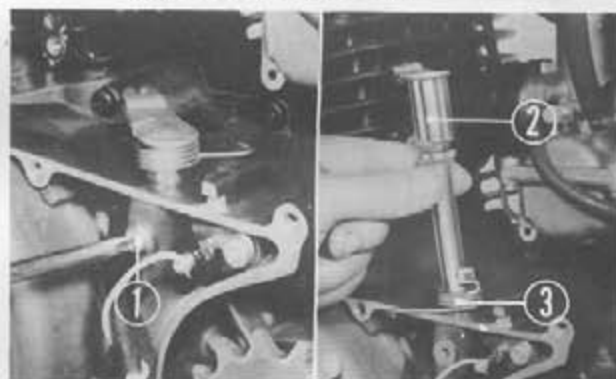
① 5mm special bolt ② Clutch lever ③ Clutch lever spring
